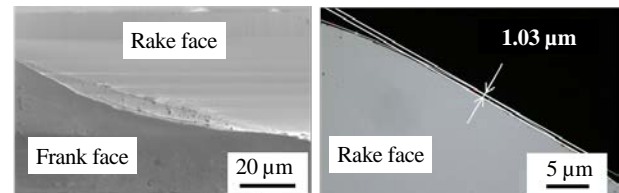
Tool wear of diamond cutting tool (100 mm/min)
